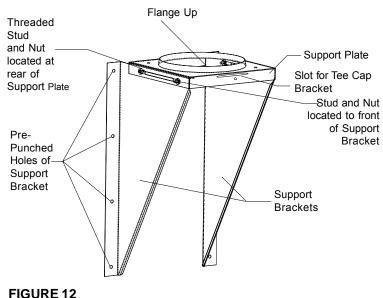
FRONT VIEW OF WALL SUPPORT ASSEMBLY
